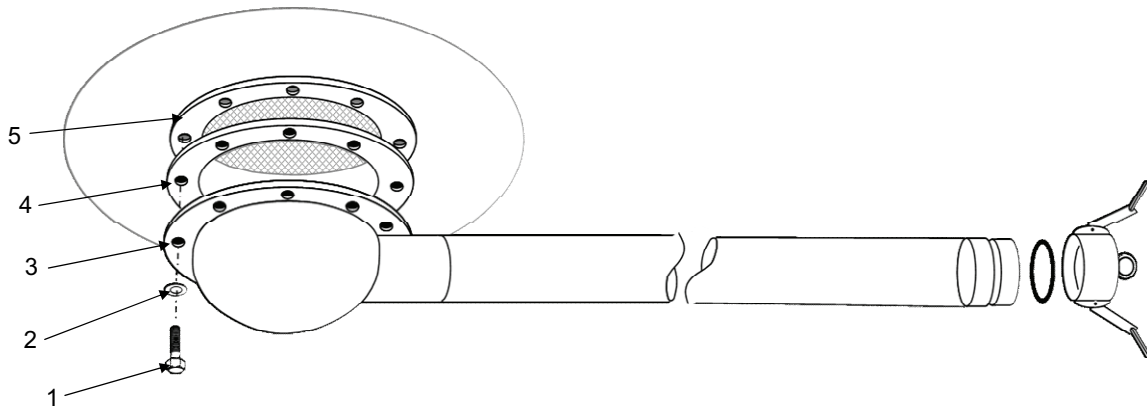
Berm Liner Drain Hose Assembly, Bowl x Cam.
